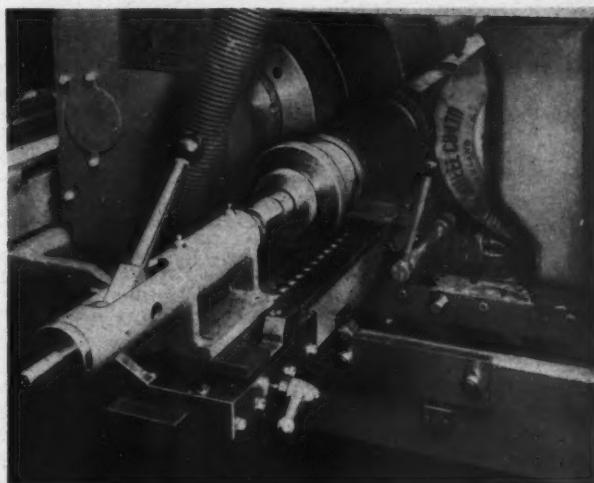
Close-up view of the working area of the machine in Fig. 1. A rubber pump liner is here seen in position on a mandrel which is held between the centres of a special fixture
